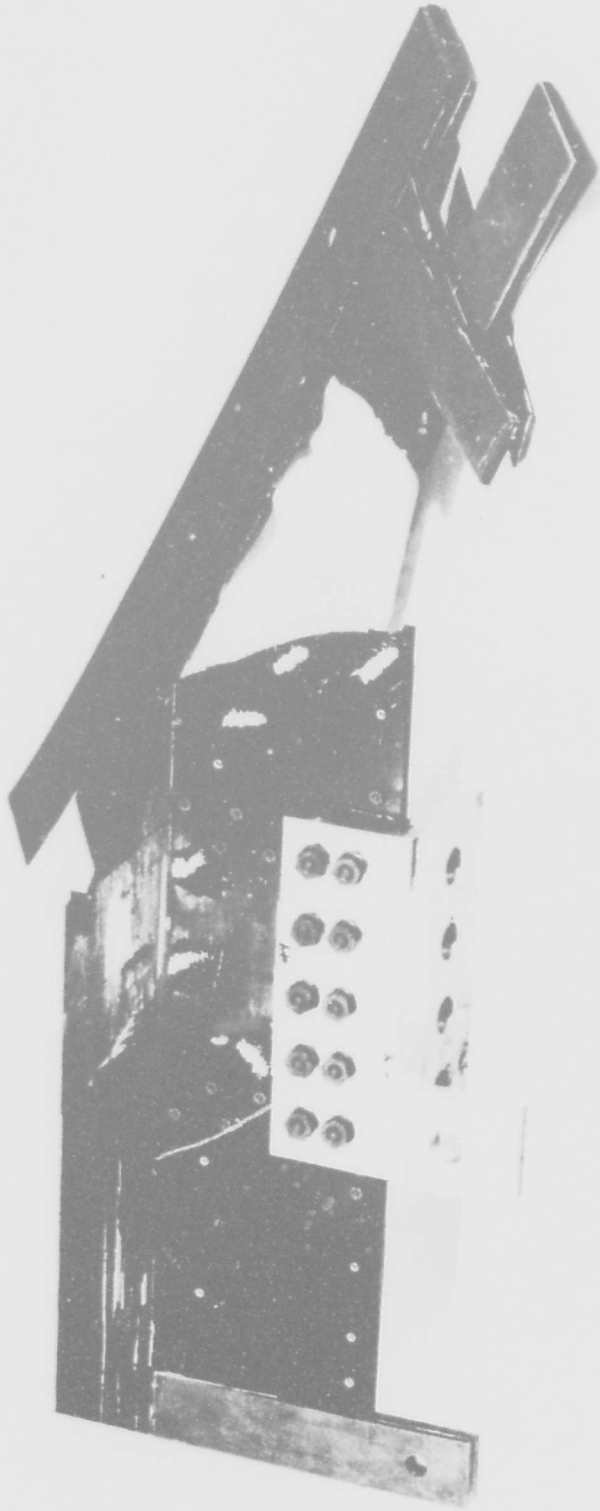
PIVOT JOINT DEVELOPMENT COMPONENT FAILURE
